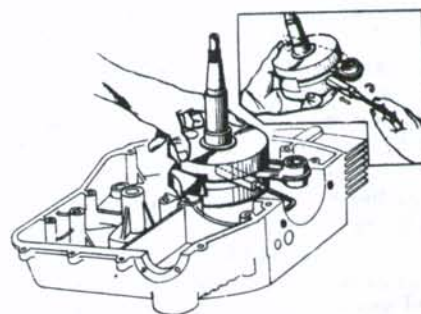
When installing the crankshaft, use a wedge block between center of flywheels. Remove wedge block after crankcase halves are assembled.
